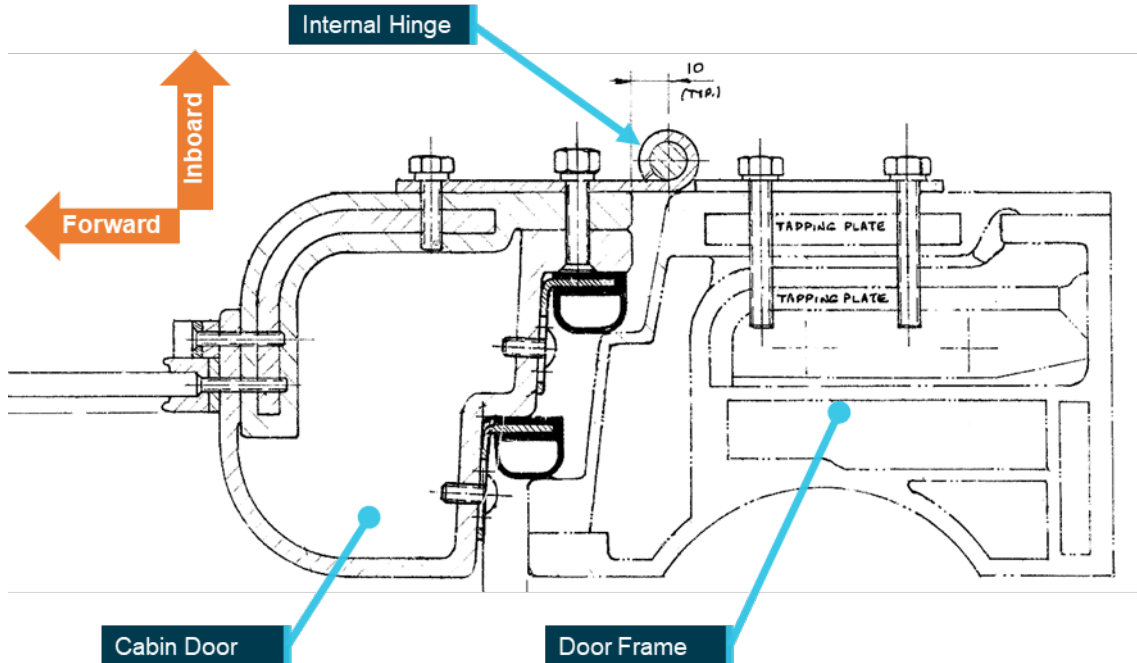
Inside view of cab door opening and fitting locations (dimensions in mm)
